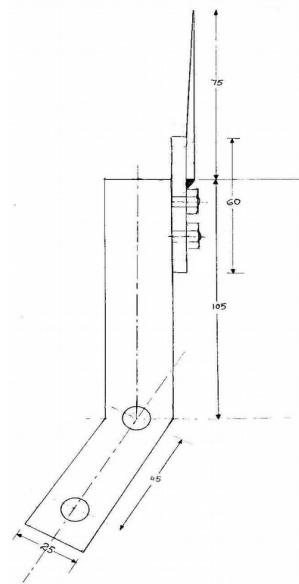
Angular 2-arm lever with blade (Side View)
